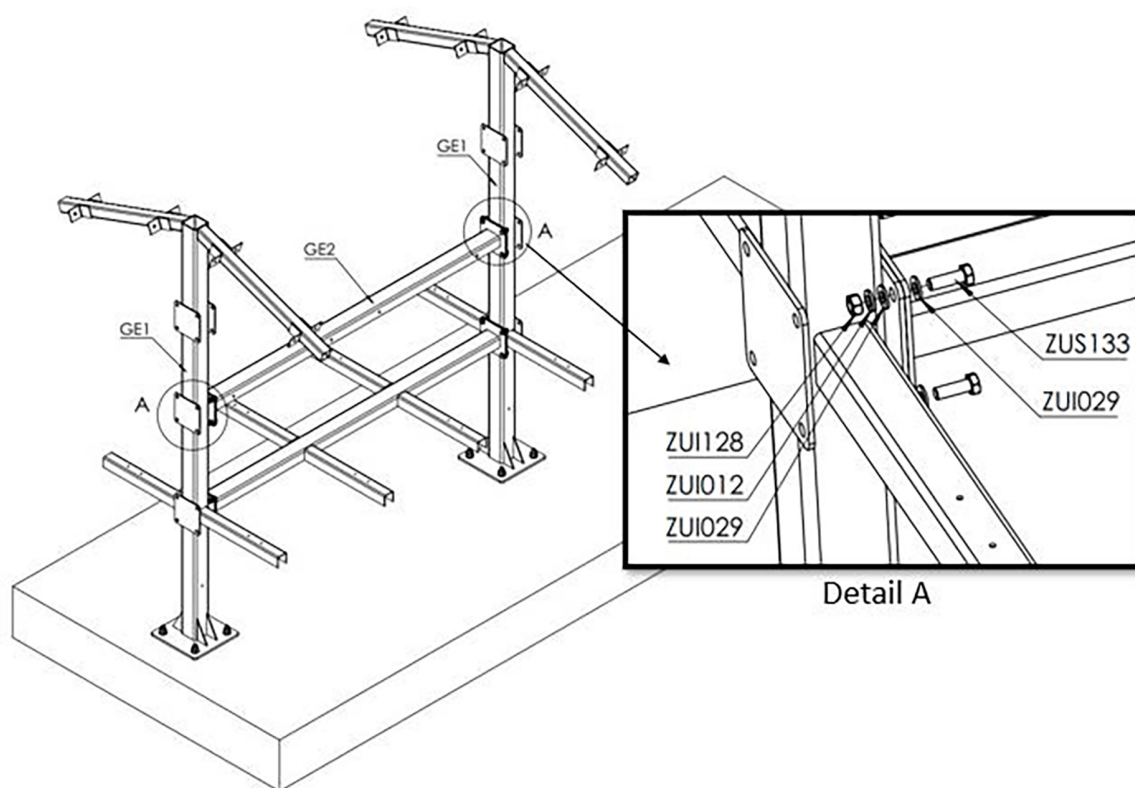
Assembly — Inverter rack — GE2, GE1 (detailed view)
